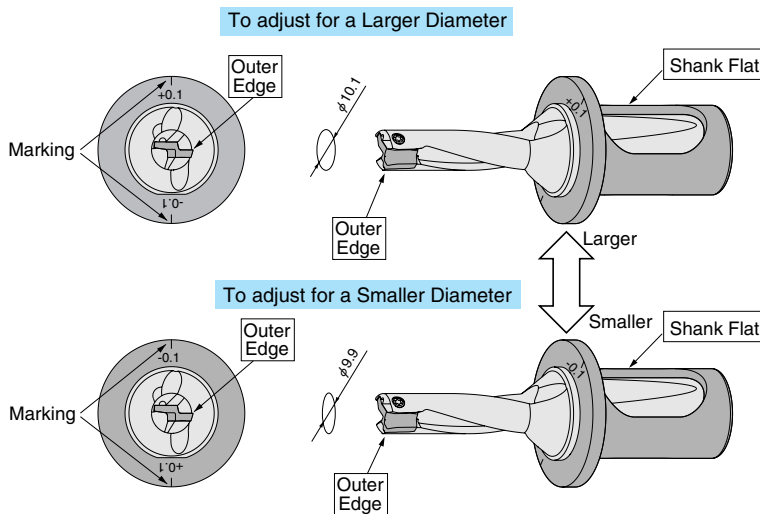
Diameter Adjustment Method (e.g.) φ 10 Drill
